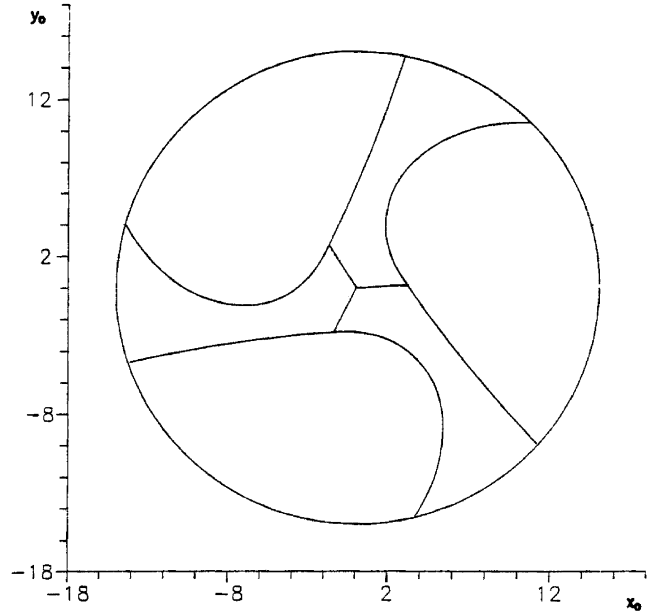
The front view of the major cutting edges of a three-fluted drill.
